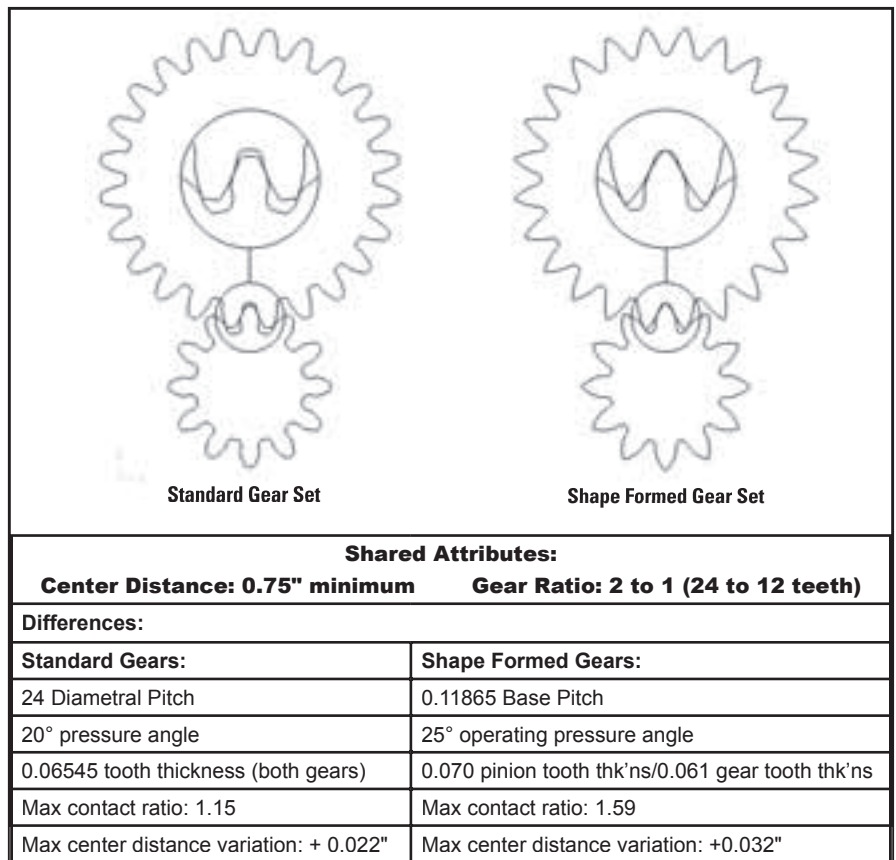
Comparison of standard gear mesh to custom shape formed gears.
